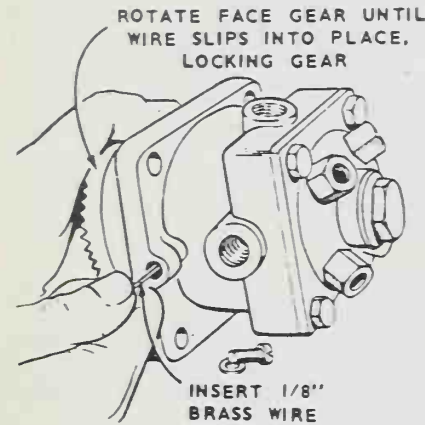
View to illustrate technique for locking PSU injection pump when timing engine.
